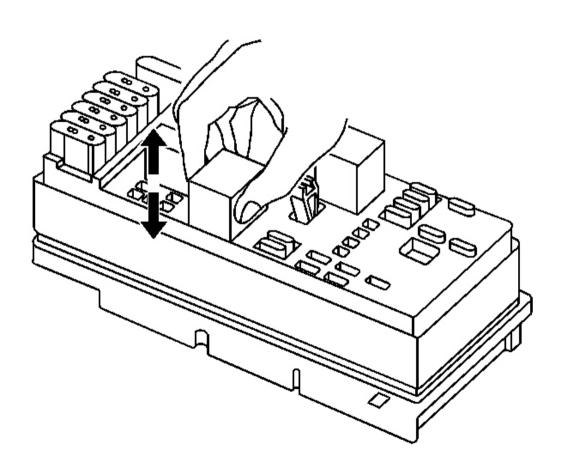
Removing/Installing Relay From Electrical Center Courtesy of GENERAL MOTORS CORP.
